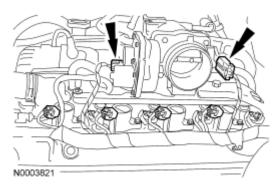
Locating Throttle Control And Throttle Position (TP) Sensor Electrical Connectors Courtesy of FORD MOTOR CO.
